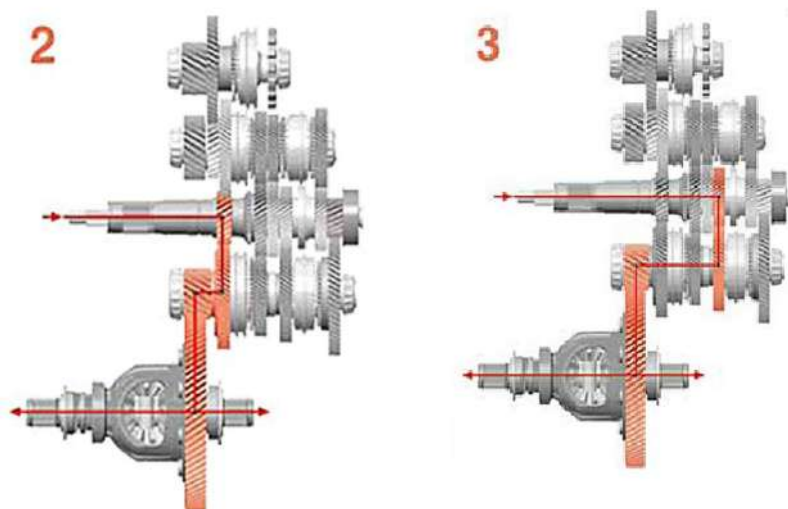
Gearbox operation in 2nd and 3rd gears
